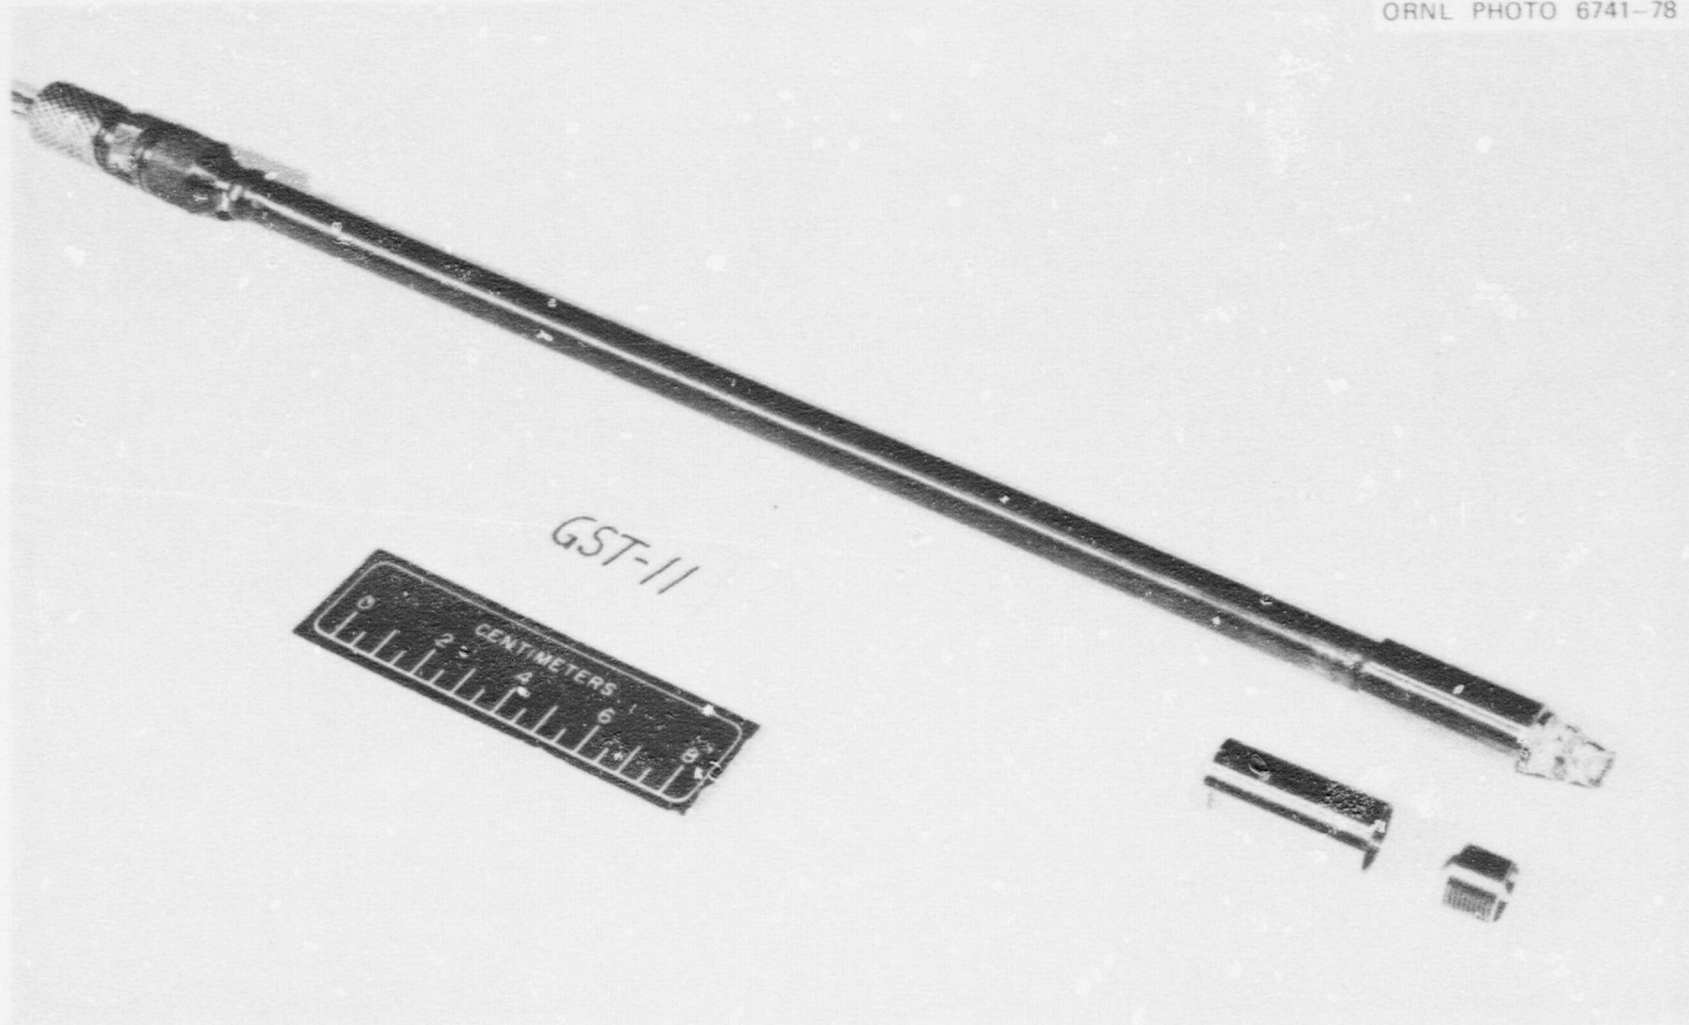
Typical single-unit epoxy and sleeve system assembly ready for autoclave testing.
